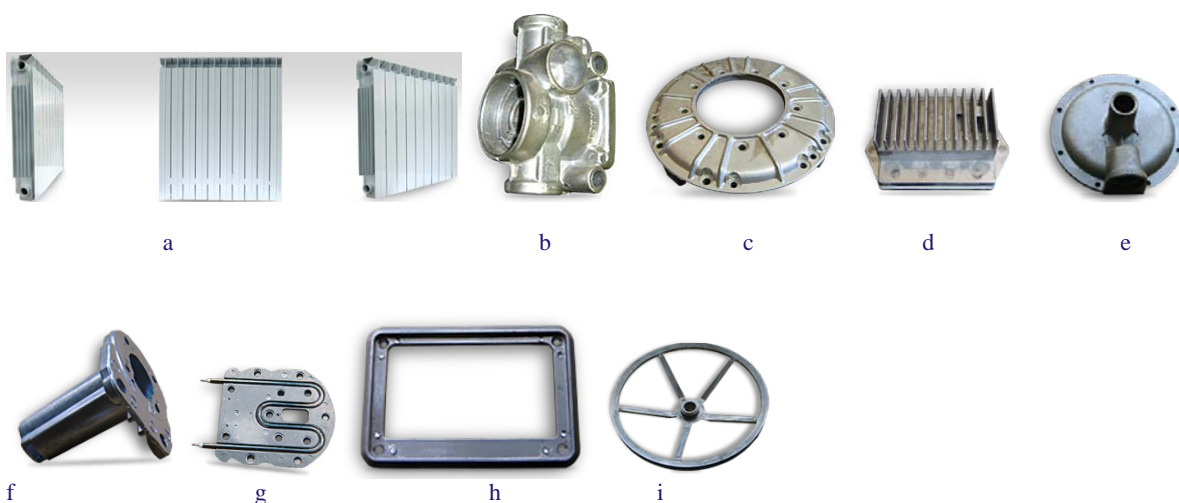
Different casting in Aluminum and Zinc Foundry LLC a. radiator, b and c. hydraulics and pneumatics parts, d and e. automobile industry parts, f and g. e; electro industry parts, h and i. miscellaneous parts.
